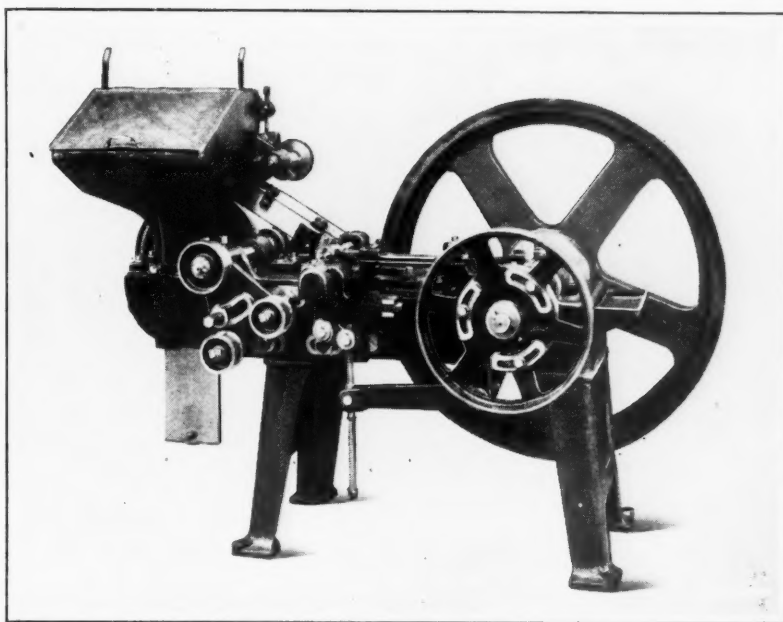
Waterbury Farrel Automatic Bolt-head Trimming Machine
